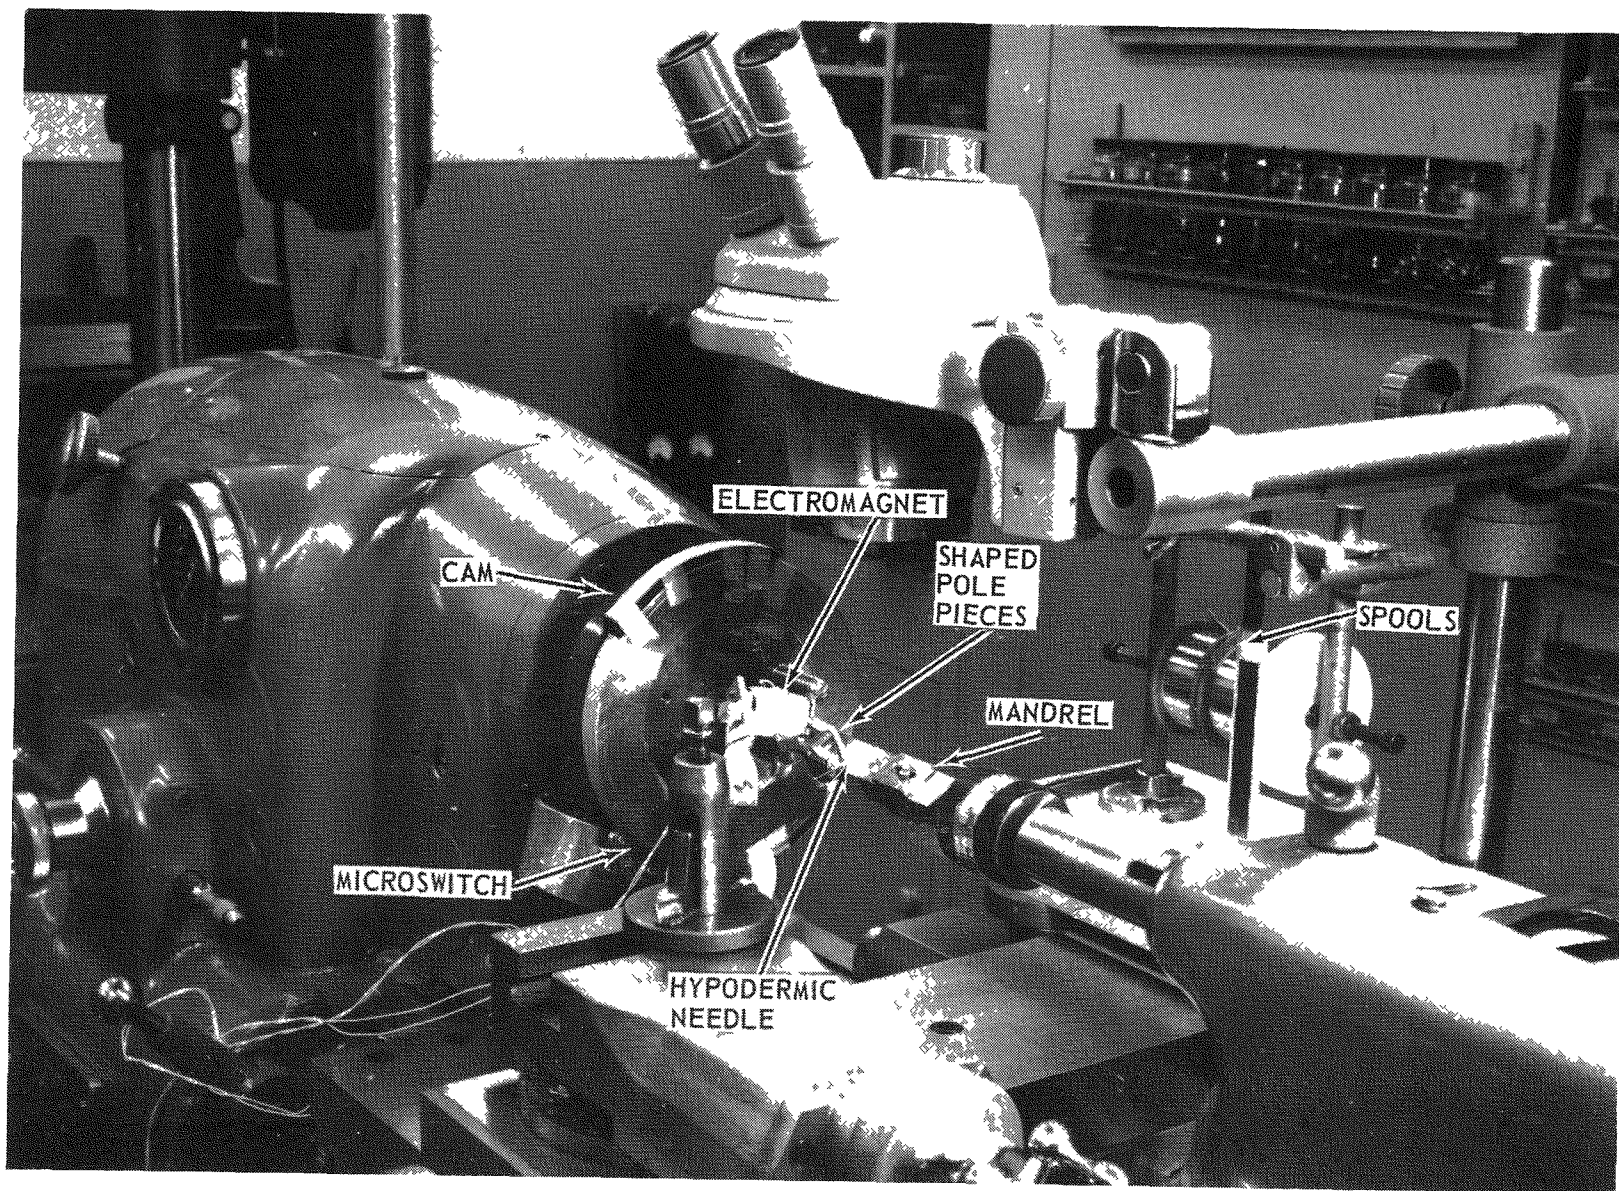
Lathe with special fixture for winding thermocouple wire on mica cards.
